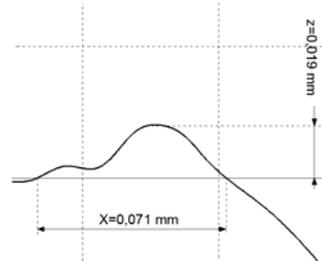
Burrs dimensions after one pass roughing and two passes finishing ($a_p=0.65$; $a_e=0.65$) 6 flute 50° helix angle
